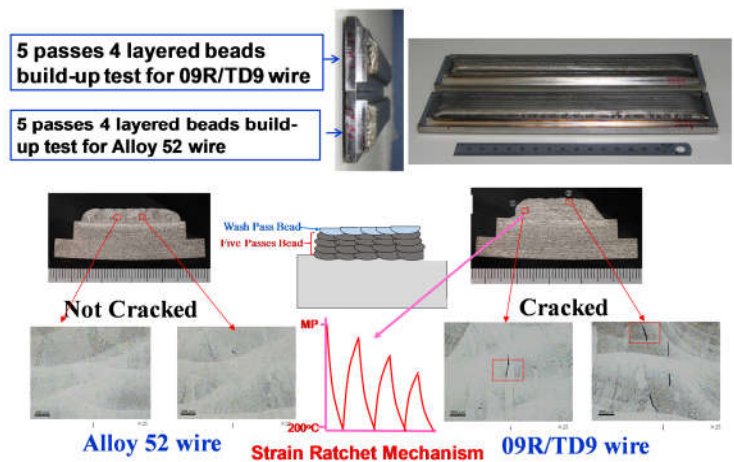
Microscopy of the cross-sections for four-pass layered build-up and wash bead test specimens using commercial Alloy 52 and 09R/TD9 wires.
